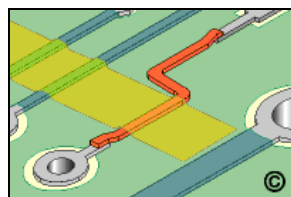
Form the shape of the Circuit Track and hold in place with Tape.
